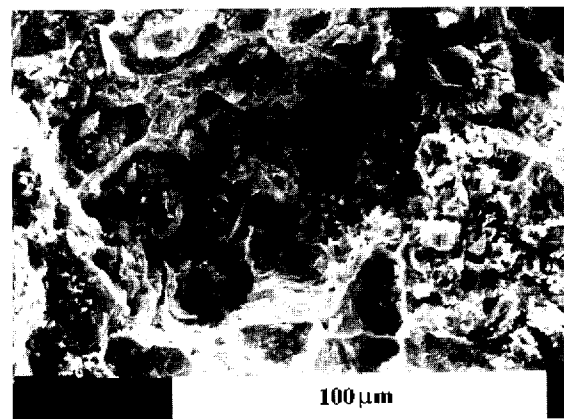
SEM image of exploded graphite from the fracture surface of tensile samples.
